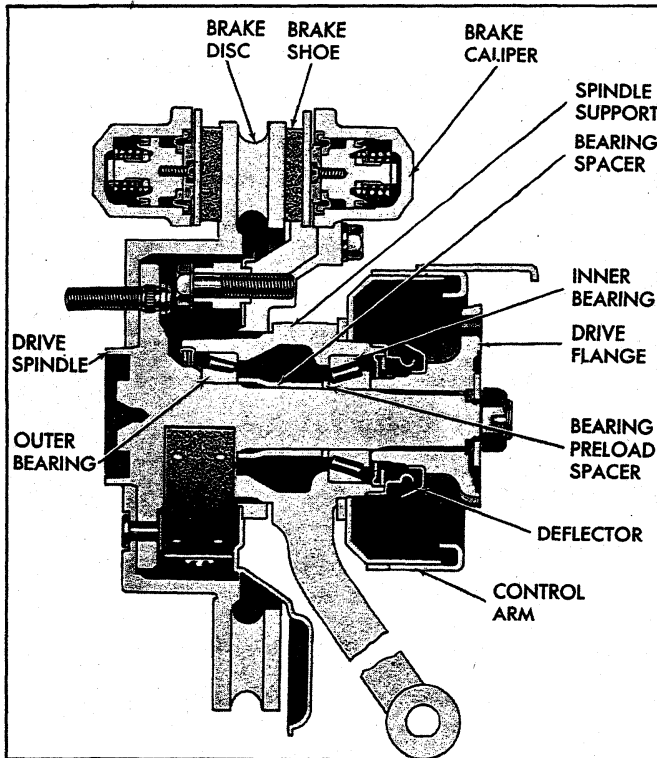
Wheel Spindle and Support Cross-Section (Corvette)
